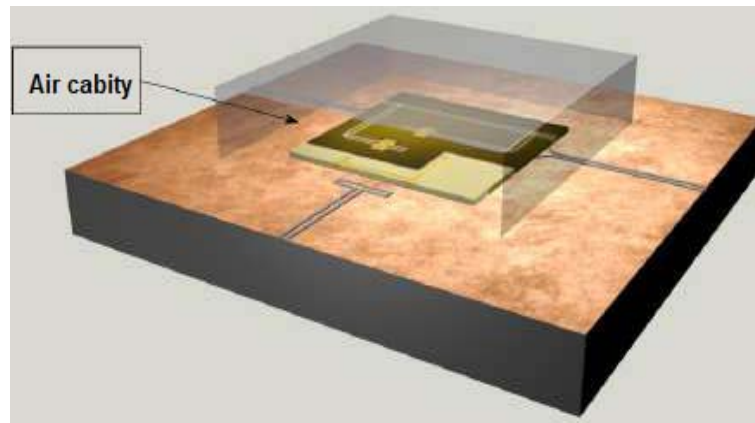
Complete package. Half of the plastic lid was cut and removed from the drawing to show the air cavity inside the package.
